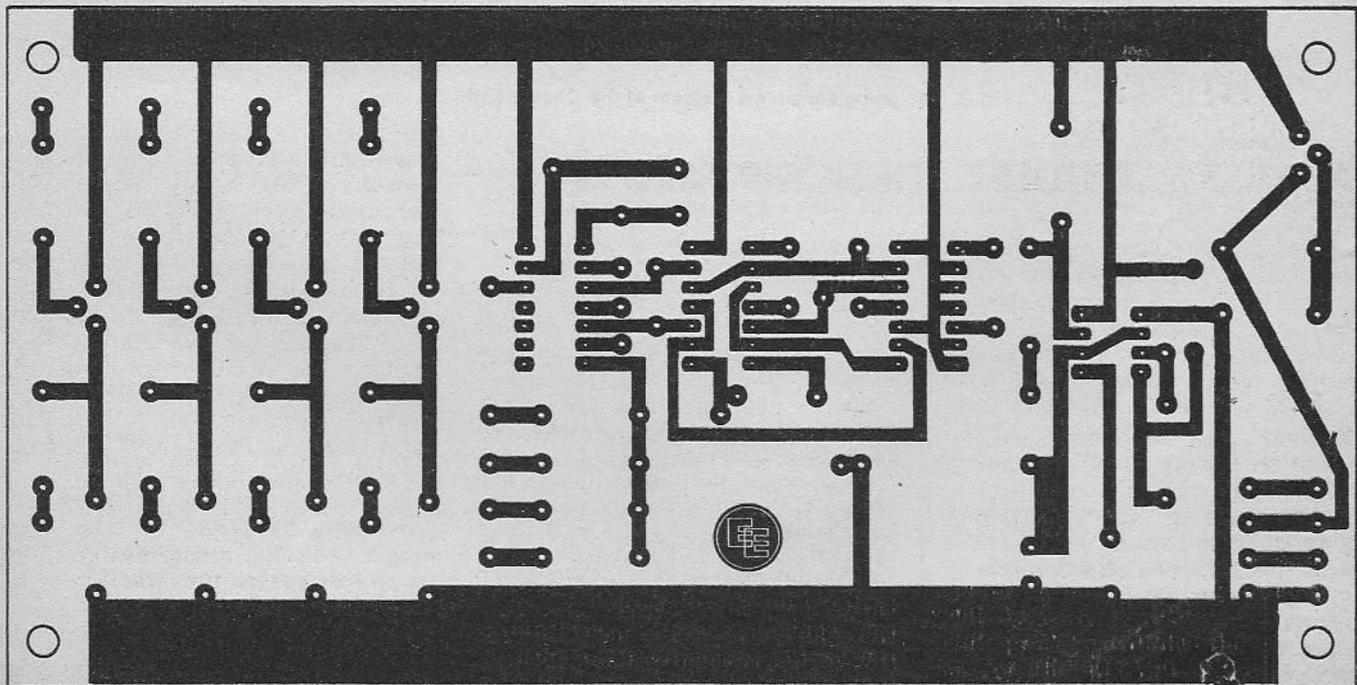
The copper pattern to be etched on the Chaser Light Display component board, shown full size from copper side.
